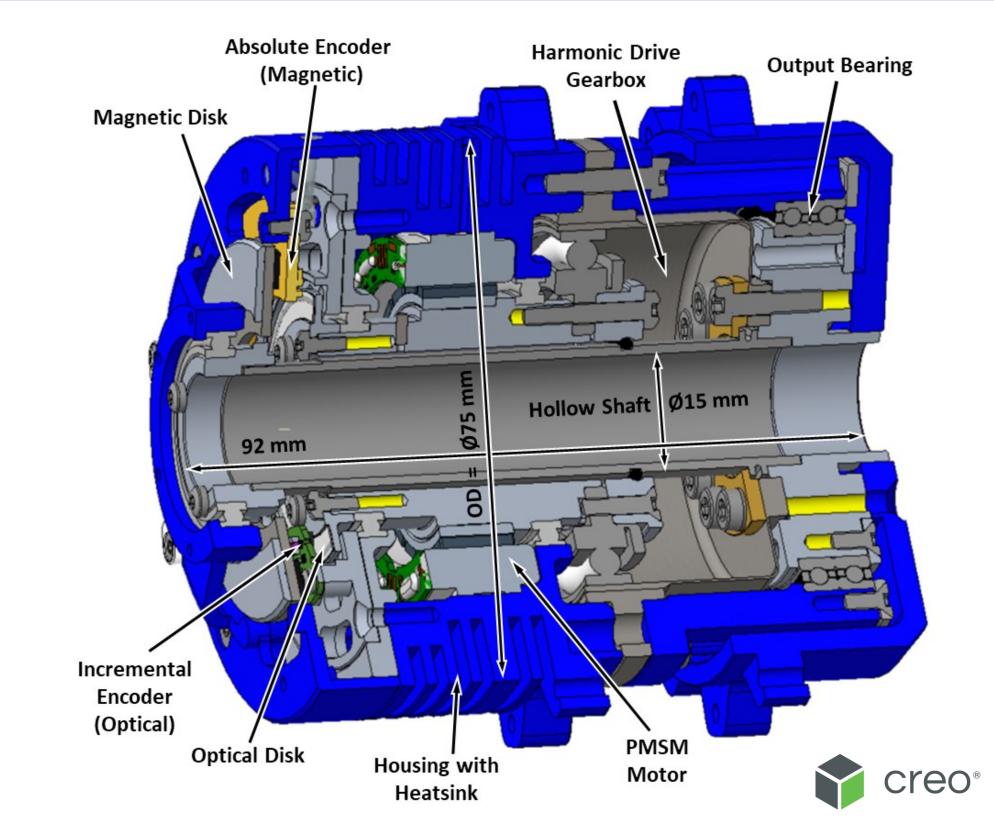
Sectional CAD view of the joint module annotating all the components.
